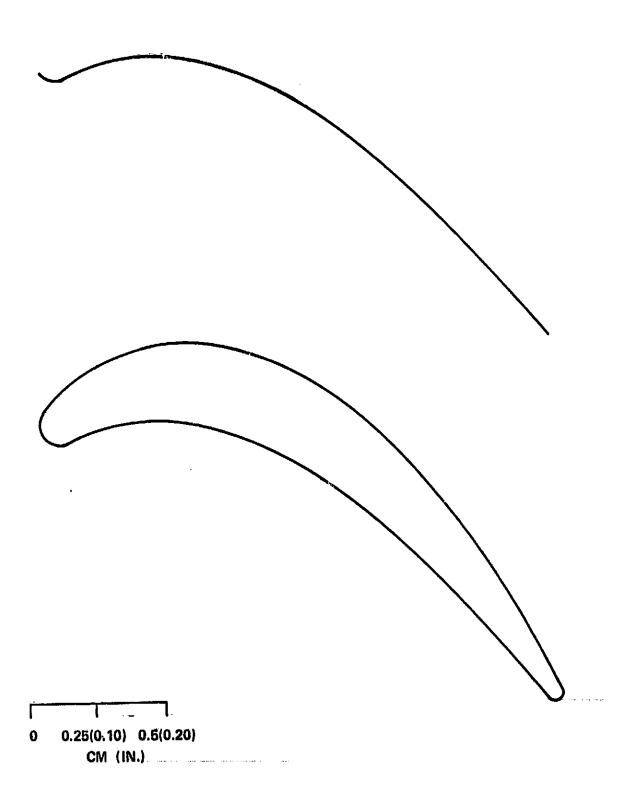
Rotor Mean Section [R = 12.37 cm (4.872 in.)] of the MATE Final Design
